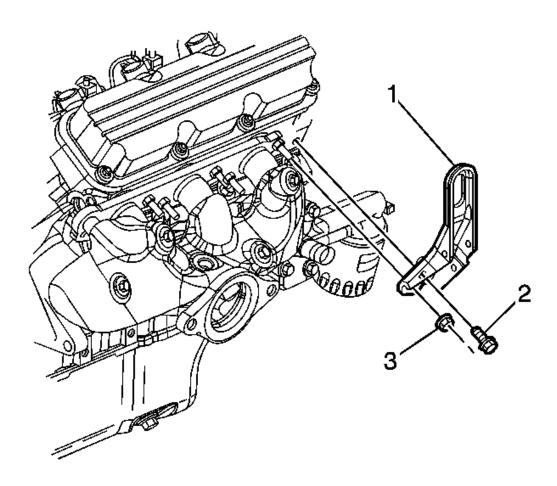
Right Engine Lift Bracket Bolt & Nut Courtesy of GENERAL MOTORS CORP.
